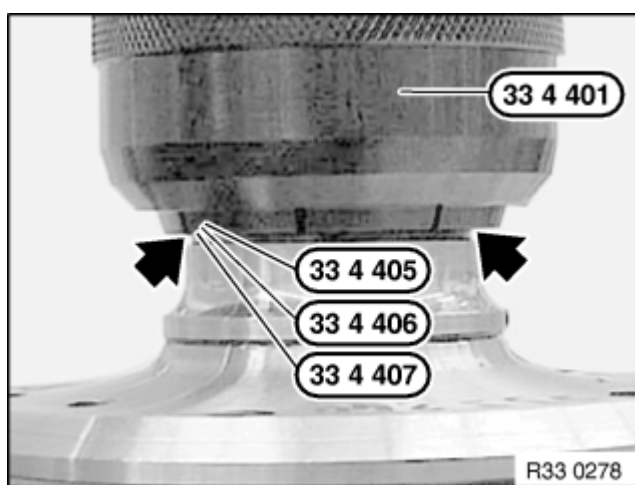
Positioning Special Tool 33 4 401 With Corresponding Insert On Groove Of Wheel Bearing Inner Race
